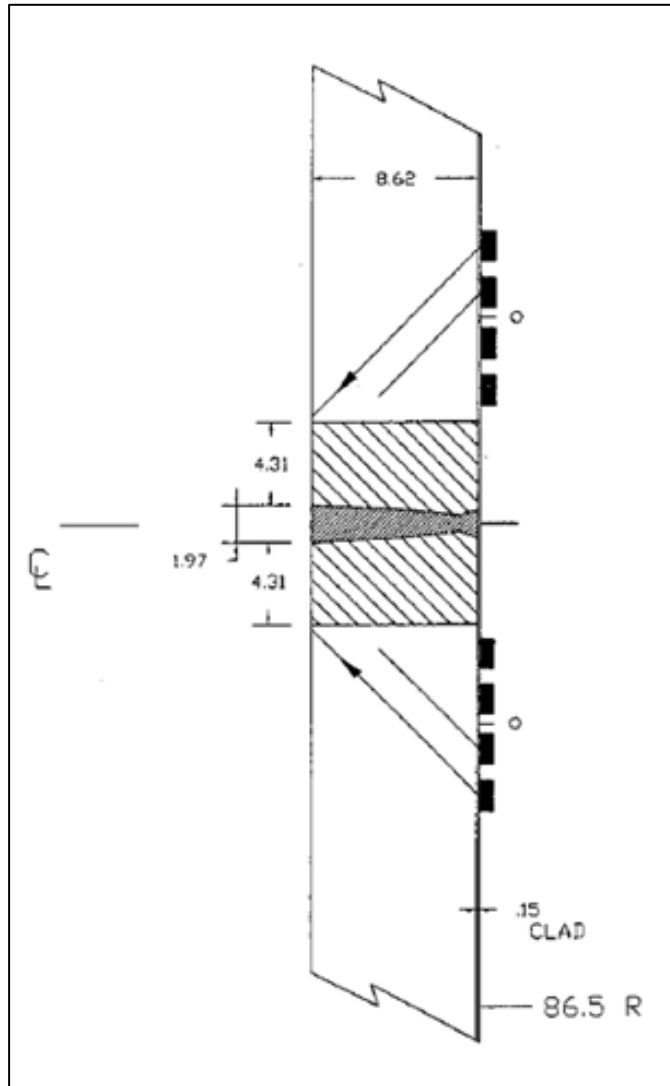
Plant I Intermediate Shell to Lower Shell Circ Weld
